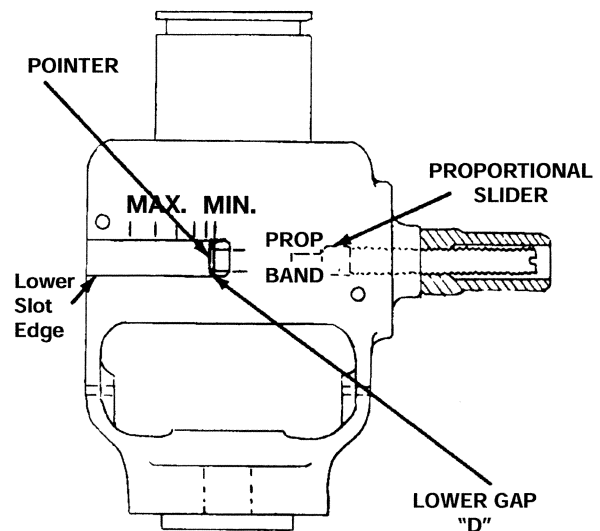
Pilot Housing view showing lower slot edge and lower gap "D" - minimum clearance should be 1/32".
